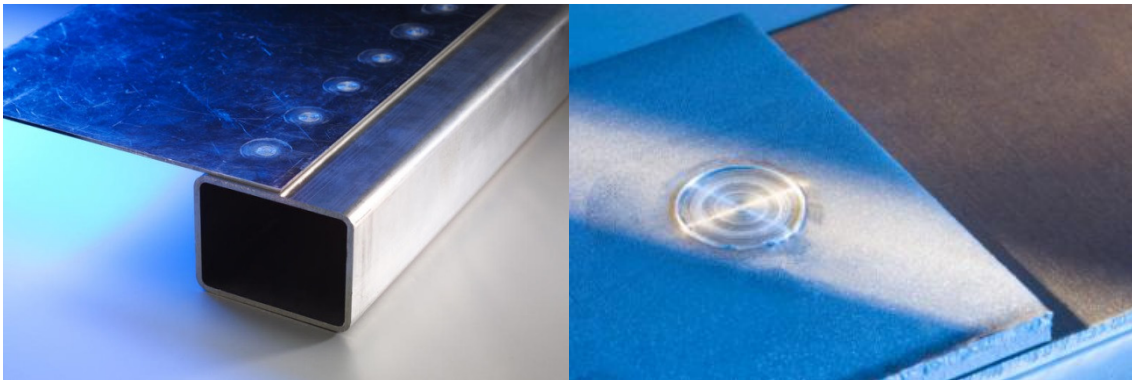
Example of a friction spot welded components (Source: Riftec gmbh)
